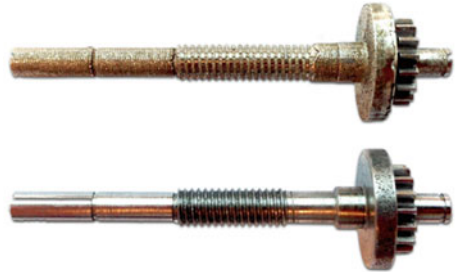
Two drive shafts, one printed, one produced on (CNC) lathe
